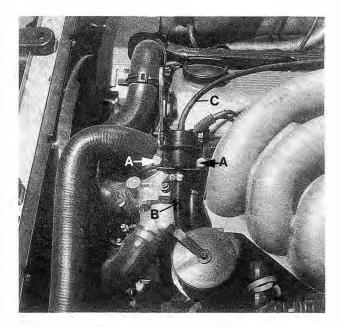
Fuel pressure regulator mounting bolts (A), return fuel line (B), and vacuum line (C).
